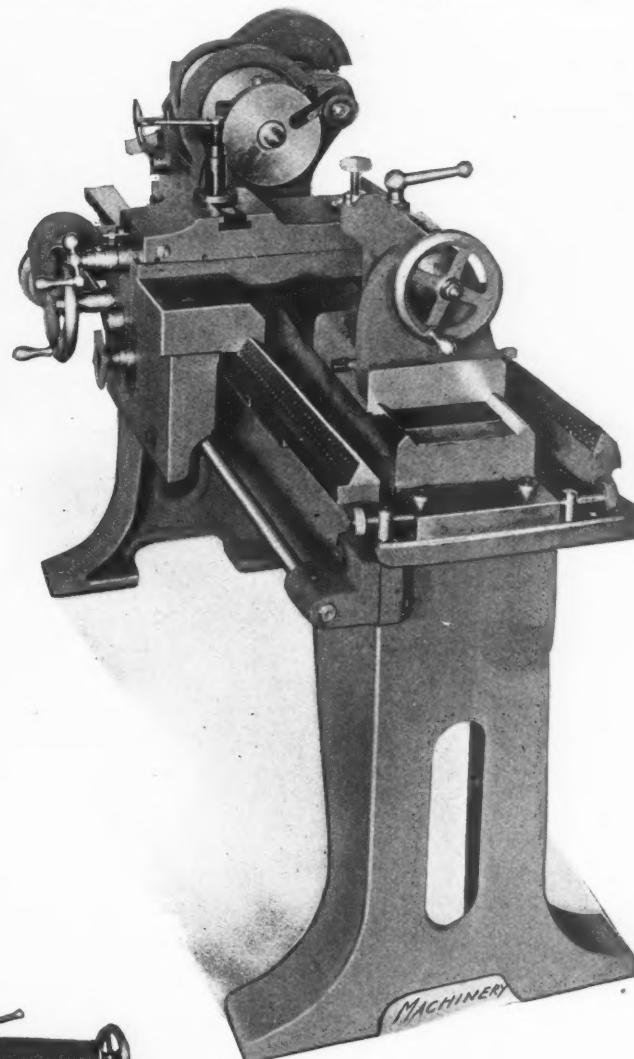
Tail End of Lathe showing Bolts for clamping Inside Bed
